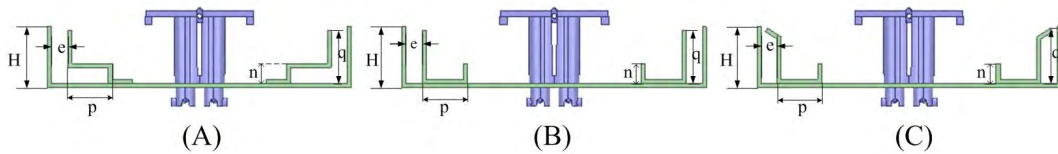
Three different structures of sidewalls. (A) The ladder sidewall (B) The u-shaped sidewall (C) The slanted sidewall.
